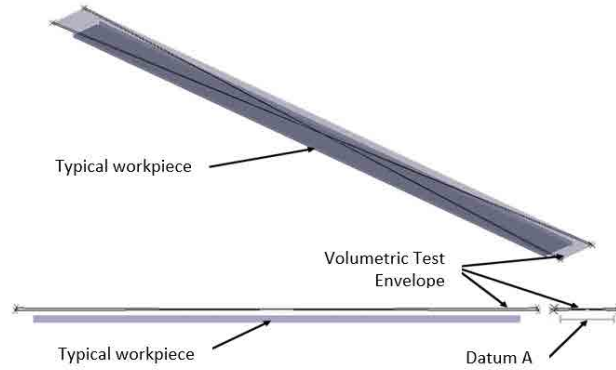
Illustration of a typical workpiece processed by the Bavius CNC Machining Center and the volume over which the volumetric test is to be applied.
